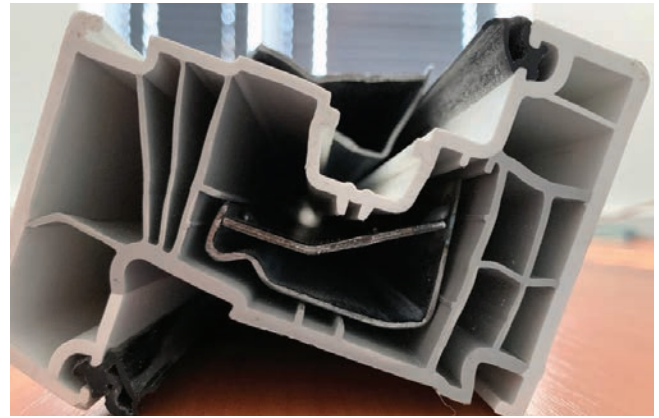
The finished profile after forming process and spot welding, assembled in the PVC profile of the window
